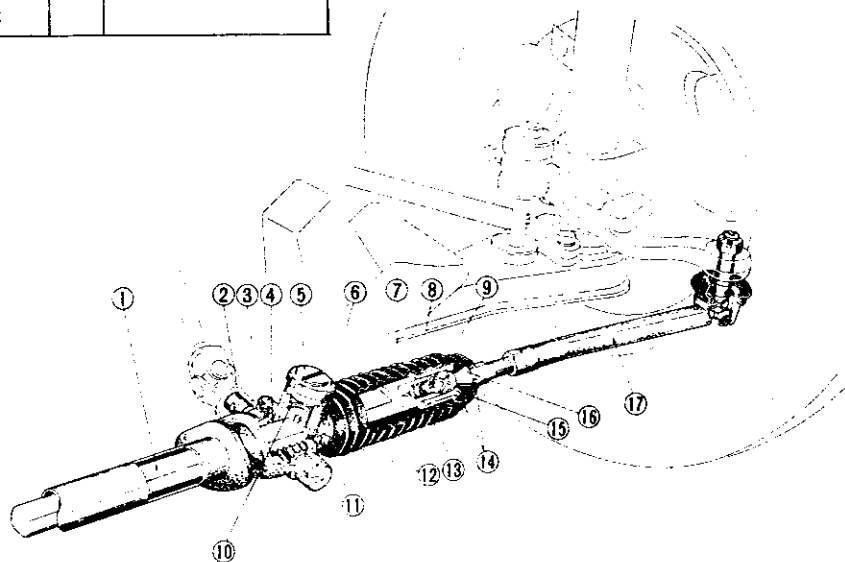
Cross-section of rack-and-pinion with side rod assembly
